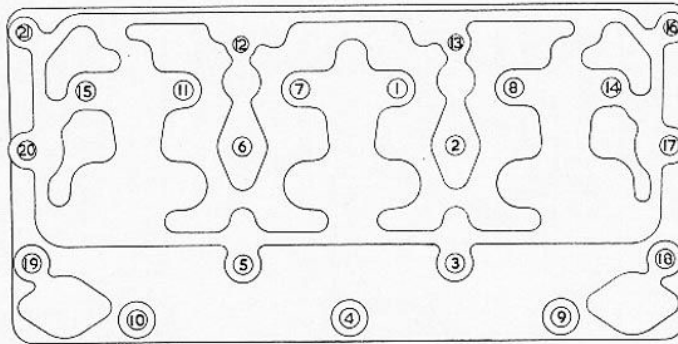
CORRECT SEQUENCE OF TIGHTENING CYLINDER HEAD NUTS
